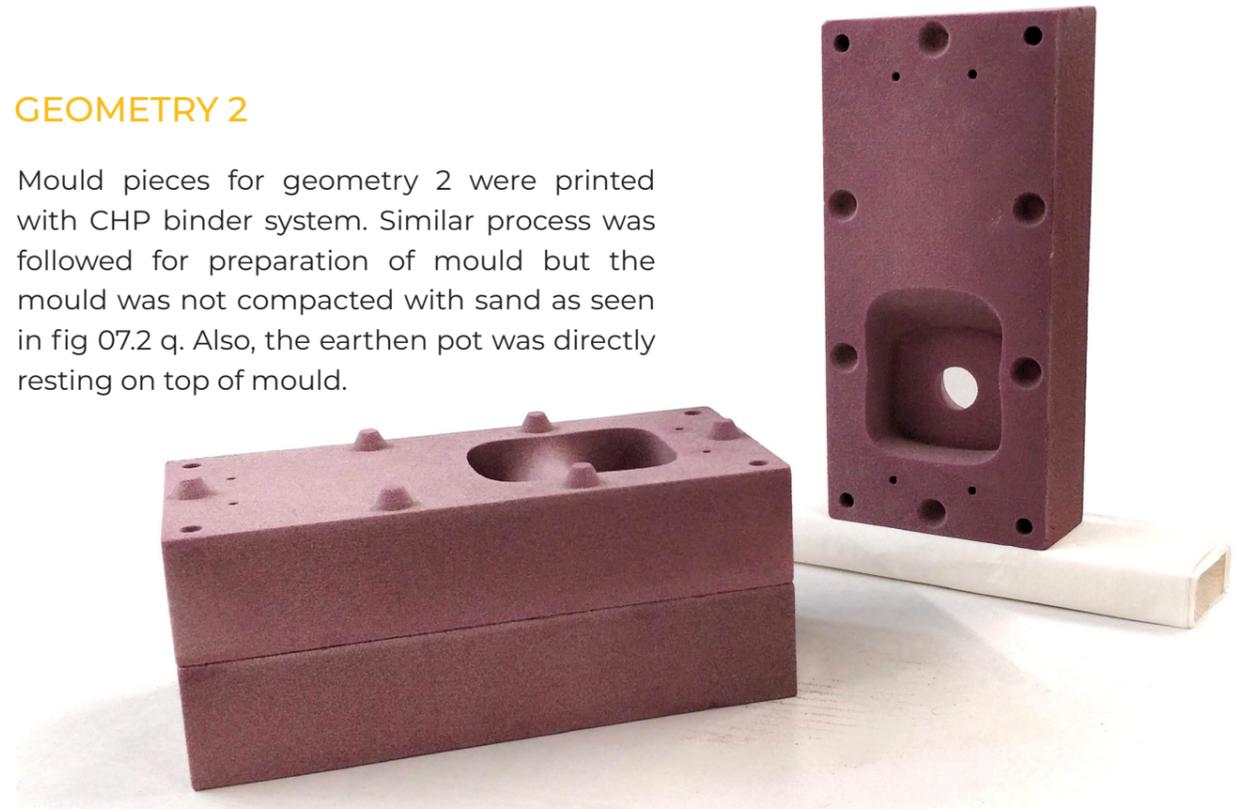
n: 3D printed mould at 1:3 scale for prototyping
